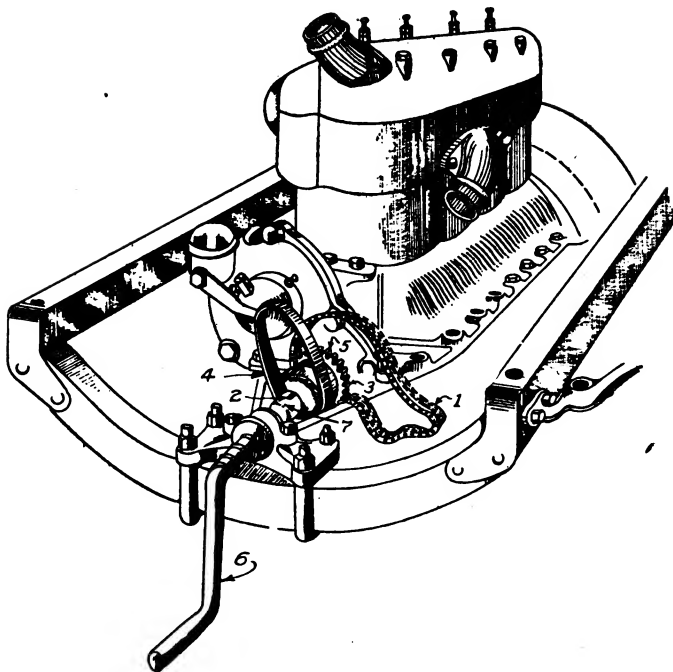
Putting Driving Chain on Crankshaft Sprocket in Gray & Davis Ford Installation
